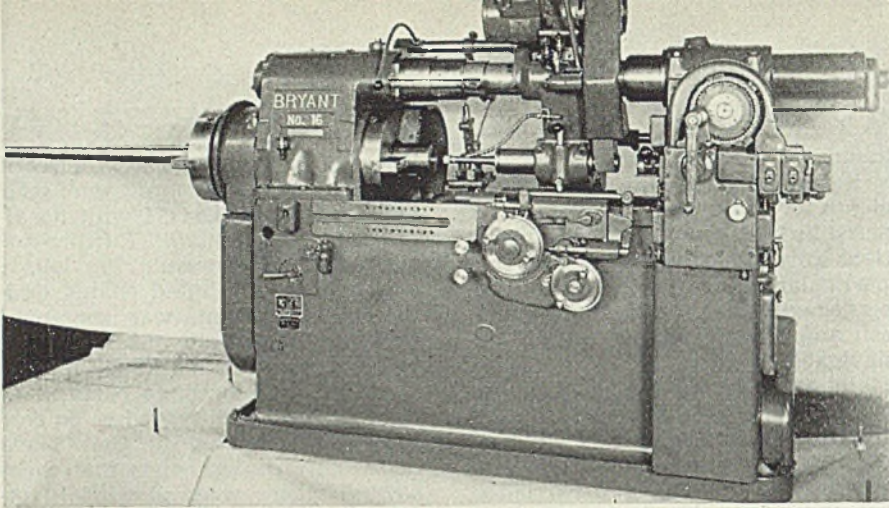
This Bryant grinder finishes powder chambers for small caliber guns like the 37-millimeter anti-tank and anti-aircraft guns, one of which is shown inserted in machine. Two feed handwheels, lower center, control grinding in conjunction with form plates. Telescopic sleeves protect sliding arbor from flying grit
